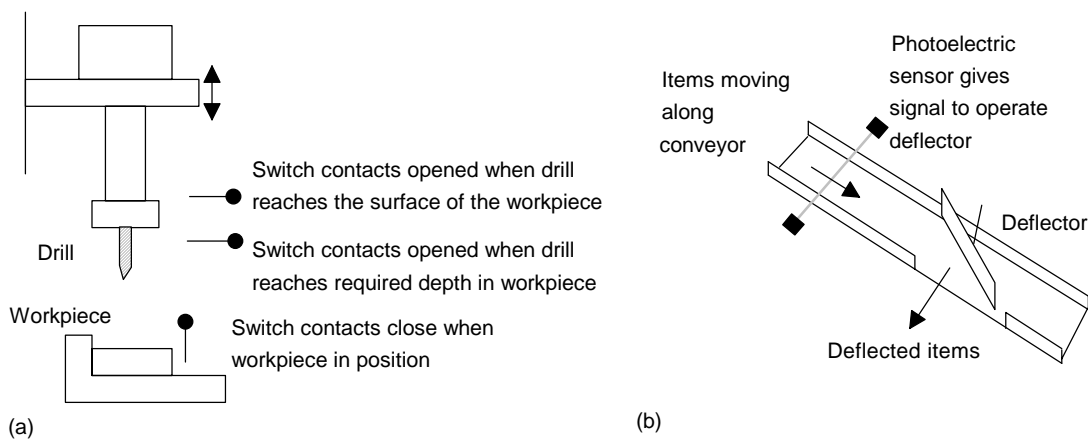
An example of a control task and some input sensors: (a) an automatic drilling machine, (b) a packing system
